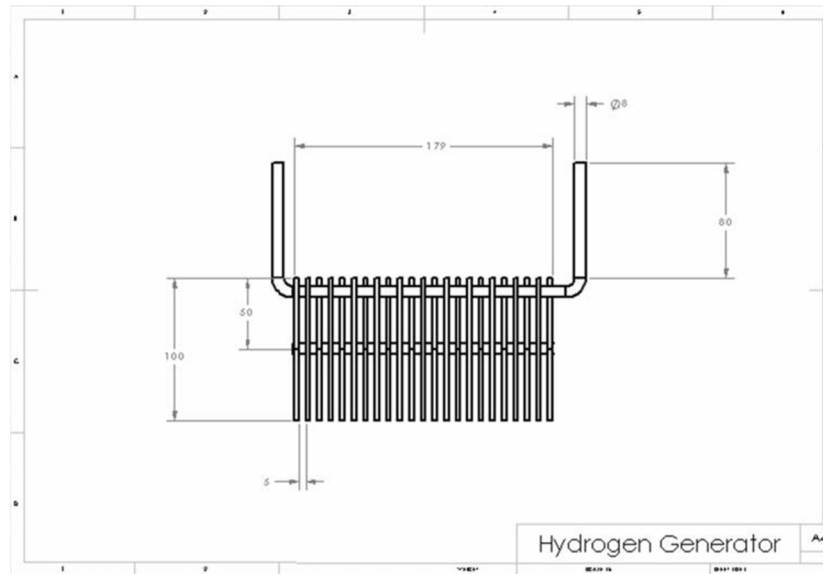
Assemble sketching plate inside the hydrogen generator
